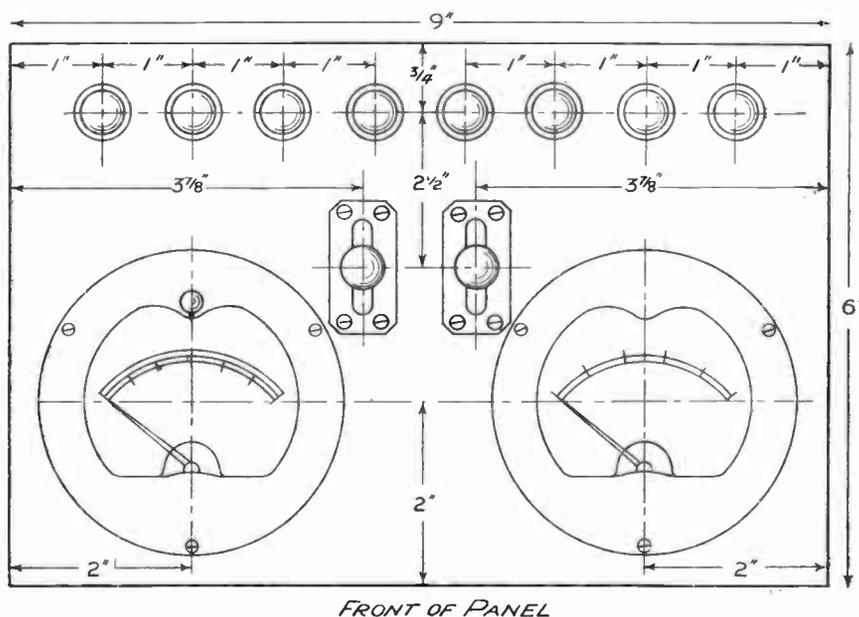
Pay careful attention to the details given in this dimensioned panel layout.
